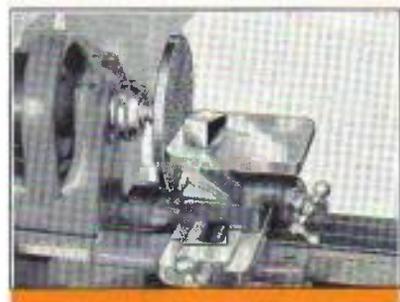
Sanding and Polishing Disc and Table, on Lathe.
